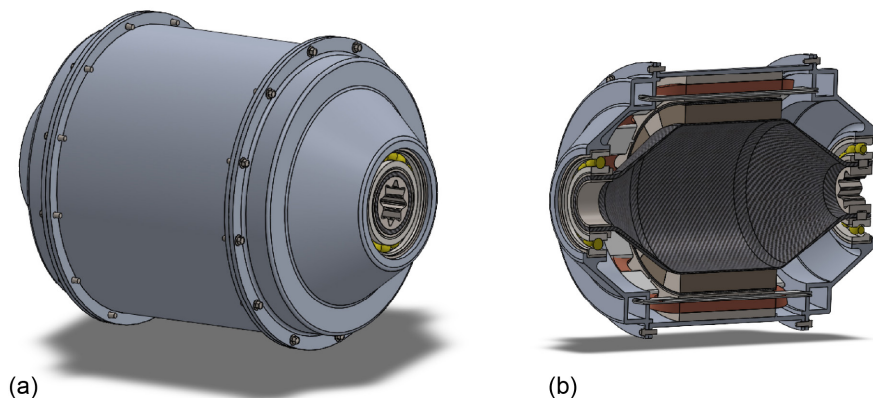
Updated motor design geometry. (a) Entire part within motor casing. (b) Cross-sectional view of shaft assembly integrated into electric motor application.
